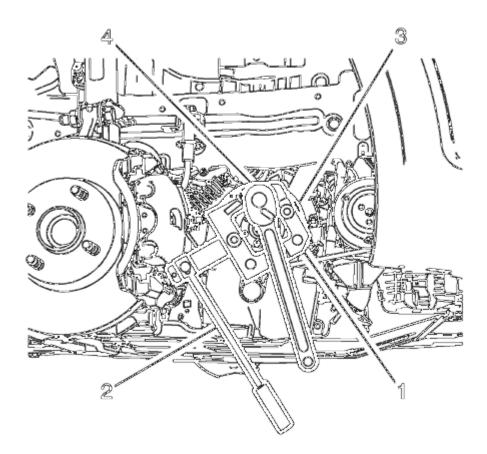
Engine Front Cover And Crankshaft Balancer Courtesy of GENERAL MOTORS COMPANY
